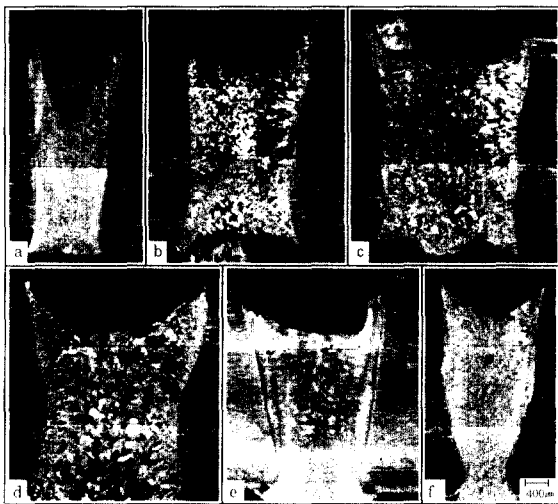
Cross-sections of CO₂ laser welds with welding conditions
